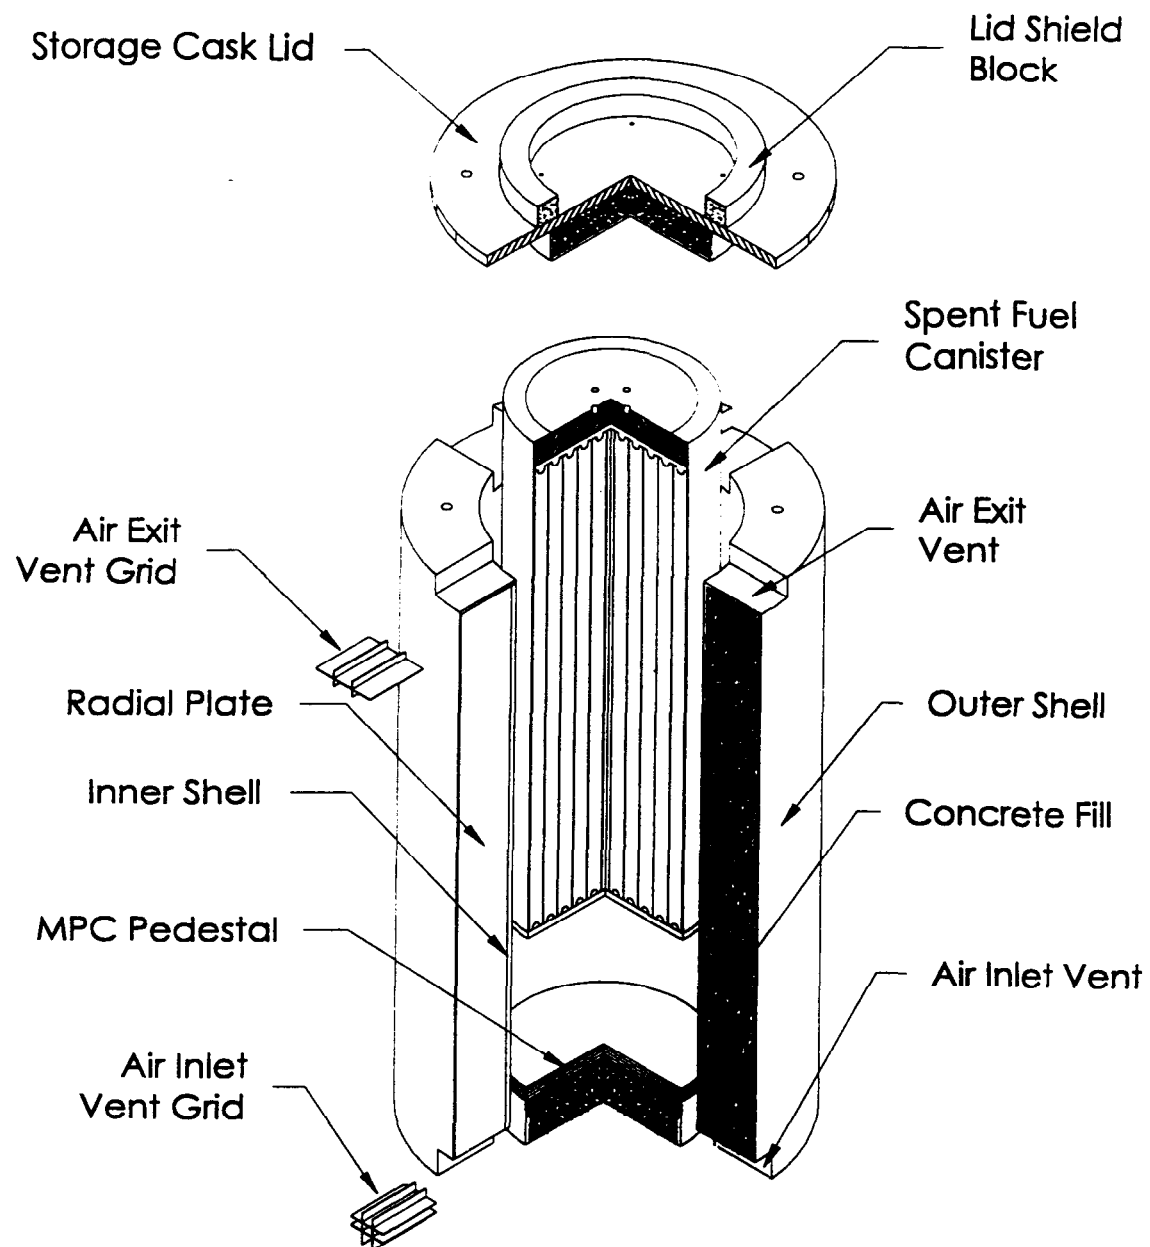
Dry Storage Cask and Spent Fuel Canister Assembly
